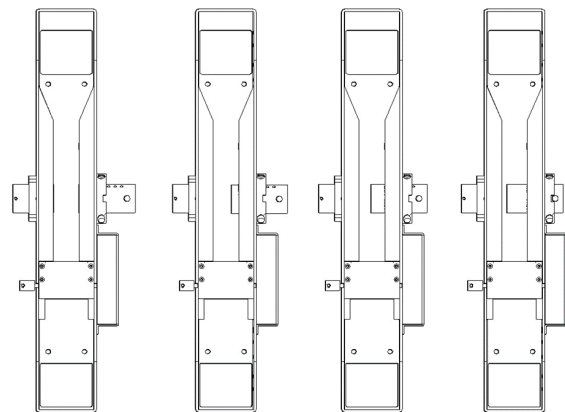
Probe positions 30mm, 23mm, 15mm and 7mm
